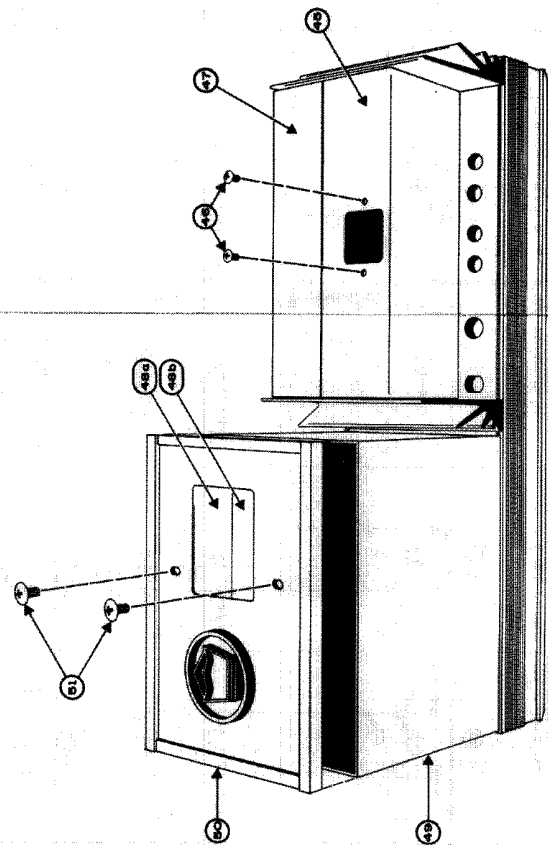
CHASSIS ASSEMBLY, EXPLODED VIEW
